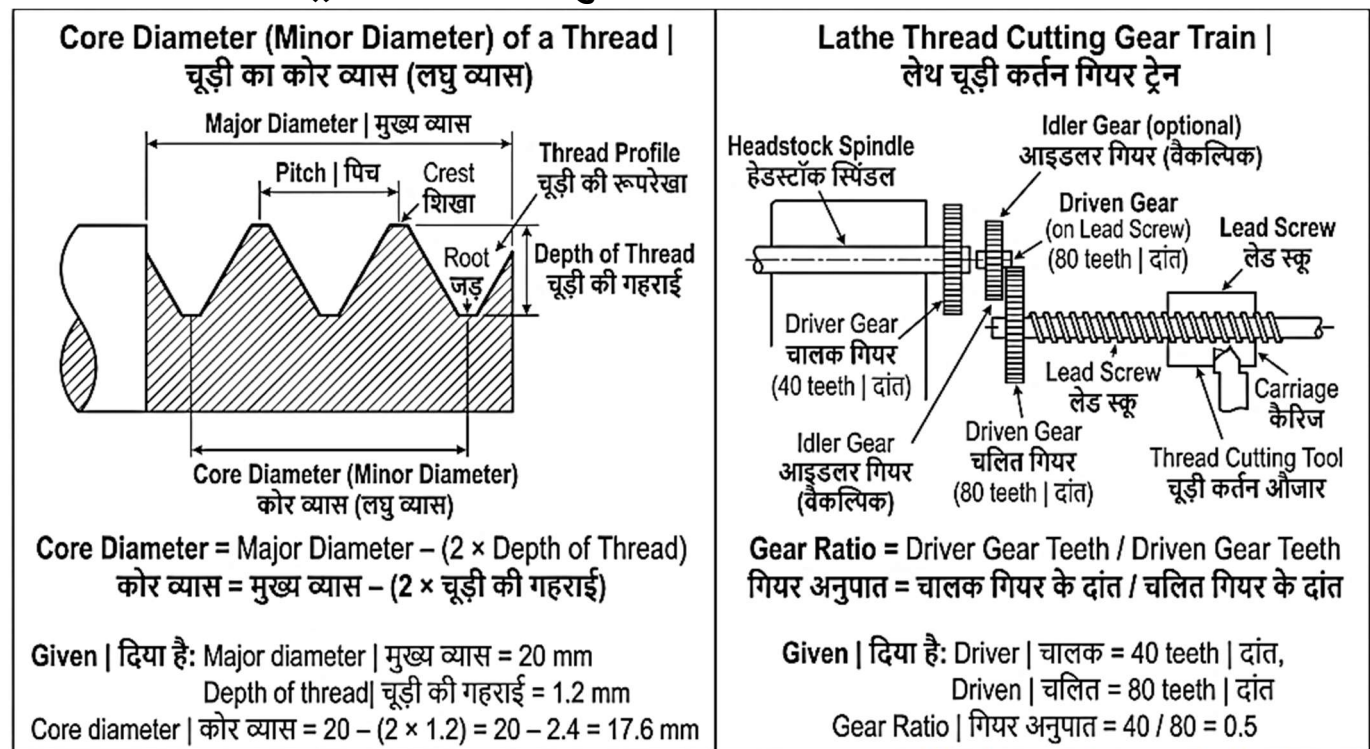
Thread Core Diameter Calculation and Lathe Gear Train | चूड़ी के कोर व्यास की गणना और लेथ गियर ट्रेन
